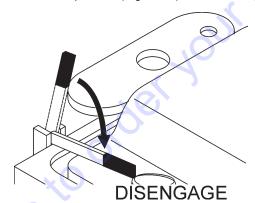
Transmission Engage/Disengage Lever (Disengage Position)
